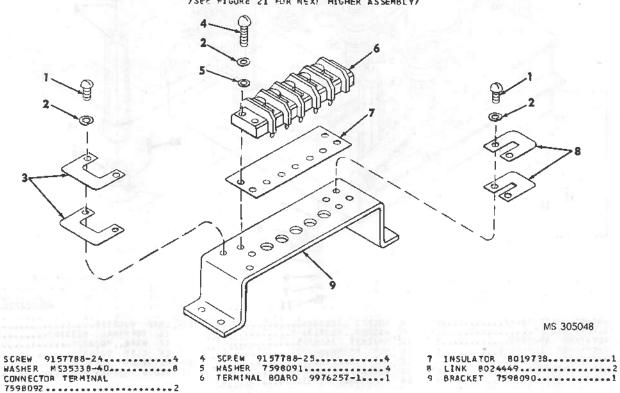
TERMINAL BOARD /9995925/-EXPLODED VIEW /SEE FIGURE 21 FOR NEXT HIGHER ASSEMBLY/
